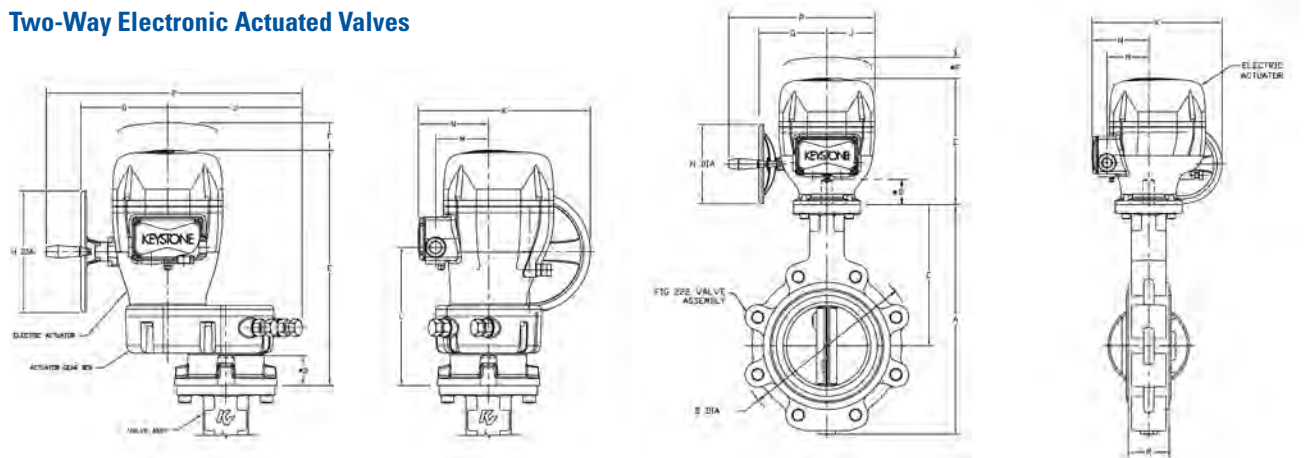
Two-Way EPI₂ Electronic Actuator Valve Assemblies
